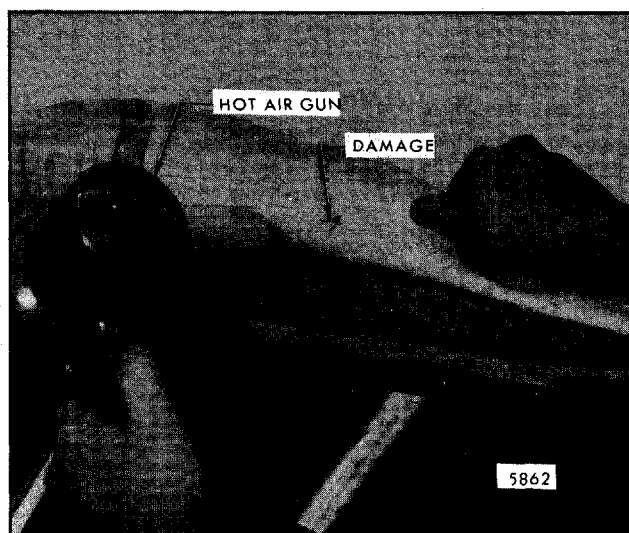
Separating Roof Cover from Foam Pad - Heat Application
